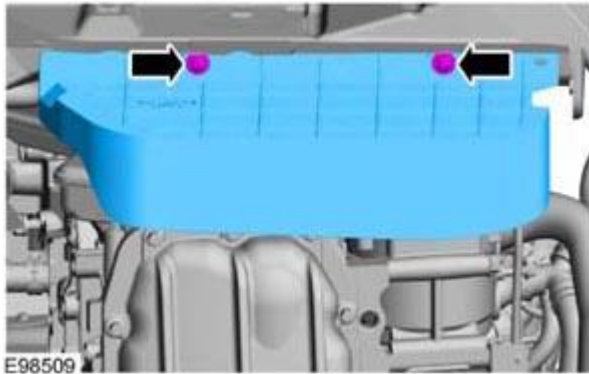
Locating Bolts And Accessory Drive Belt Splash Shield
